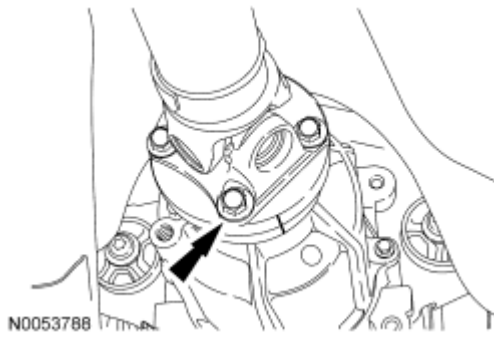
Locating Rear Driveshaft Universal Joint Flange Bolts
